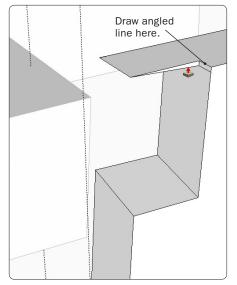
Use the Push/Pull Tool to remove one last sliver of waste to complete the dovetail joint.
